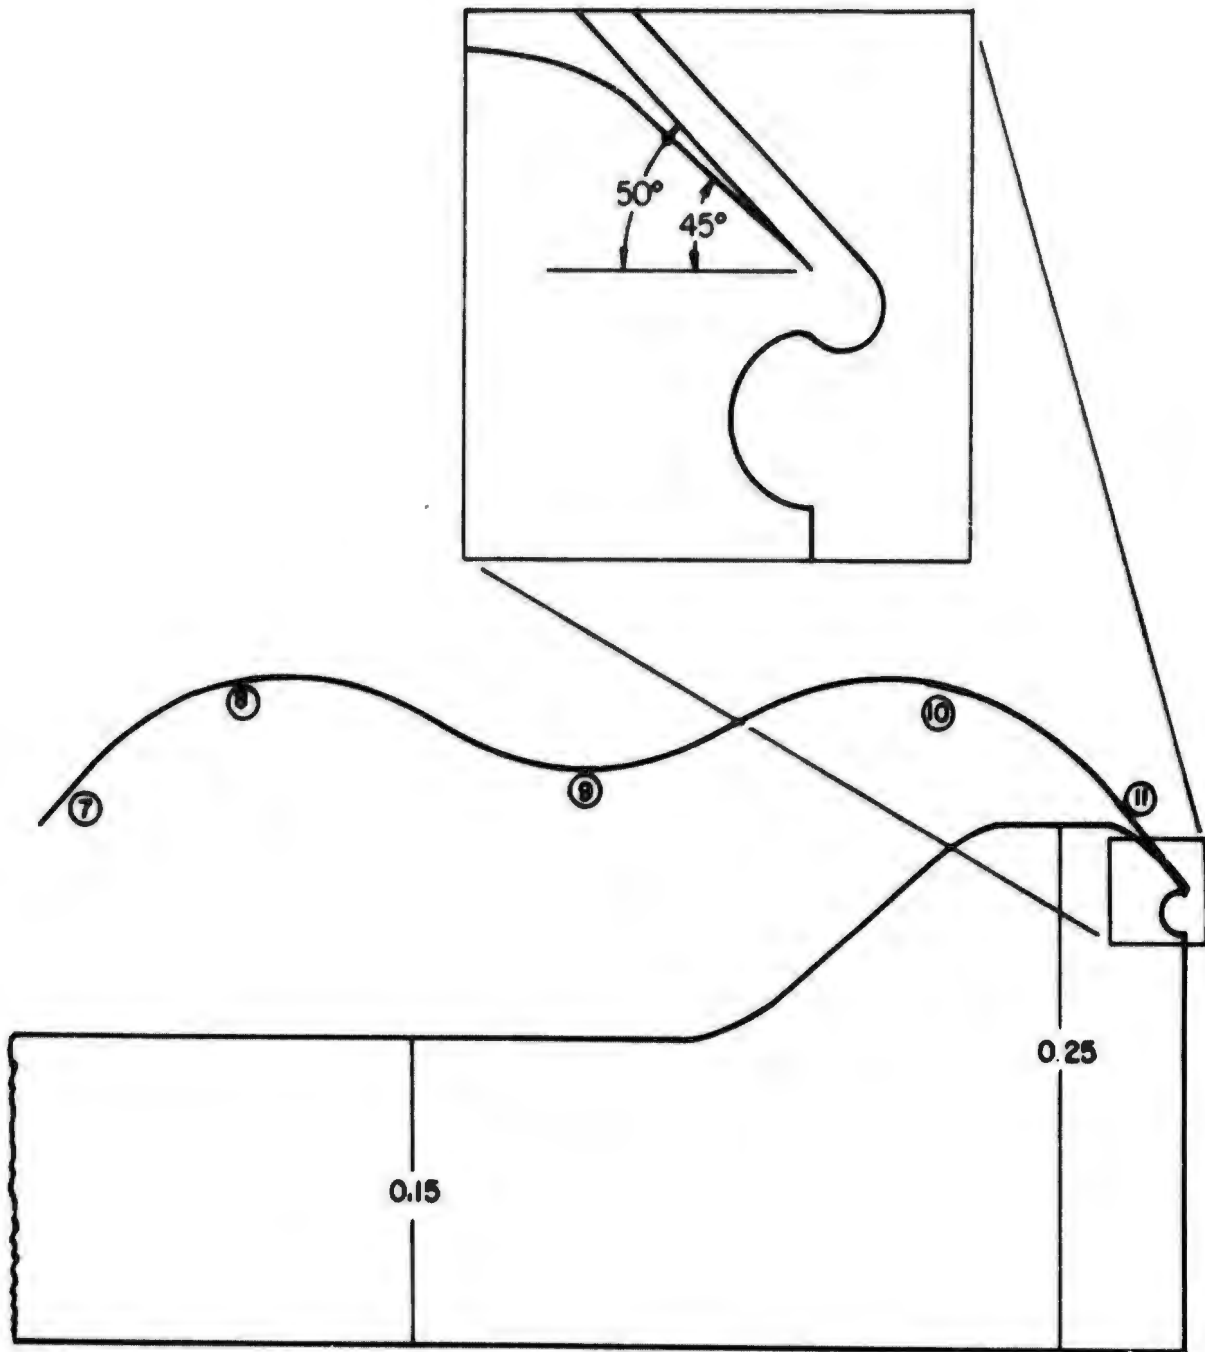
A TYPICAL LOWER END FITTING FOR A 3.5-INCH TILT-EDGE WELDED BELLOWS
